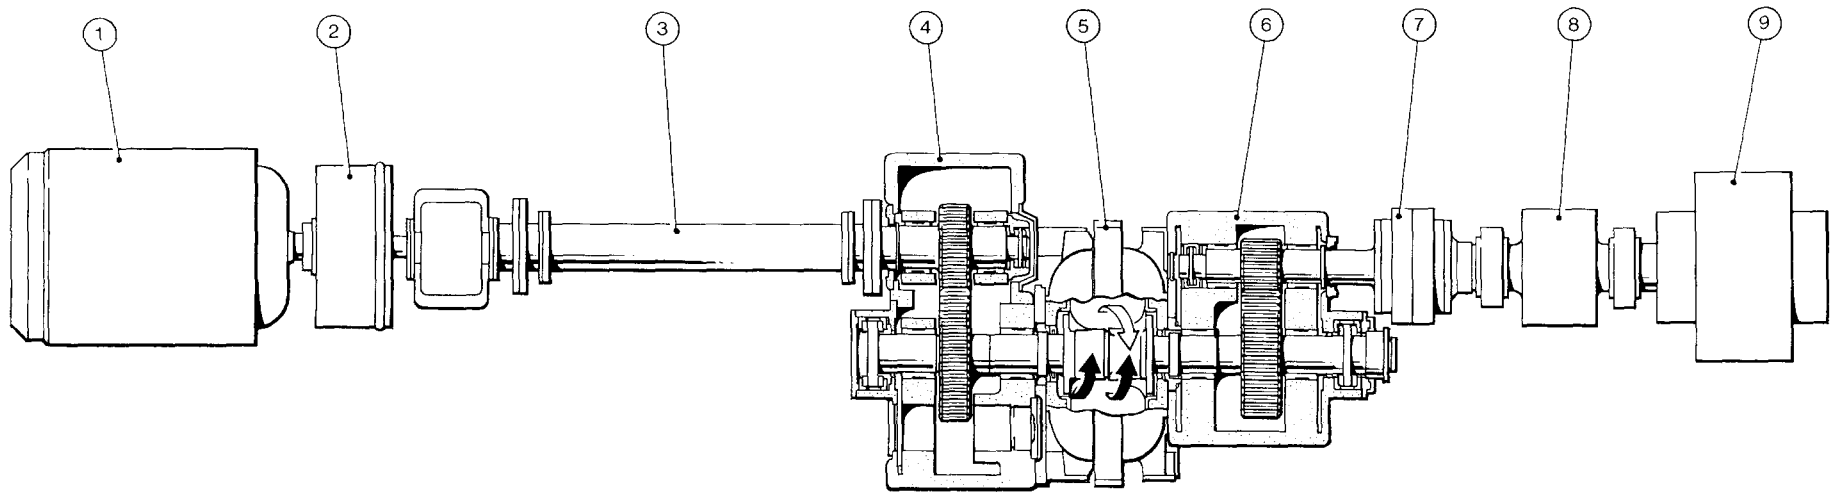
LAYOUT OF MAIN MECHANICAL COMPONENTS FOR PHASE 1 TESTING
